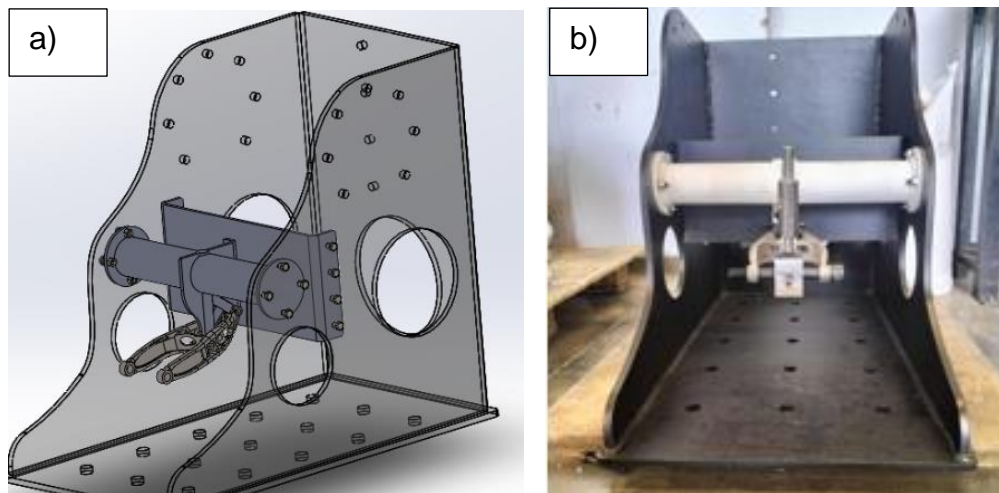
Landing gear fork performance test jig: a) CAD model b) image of the manufactured jig
